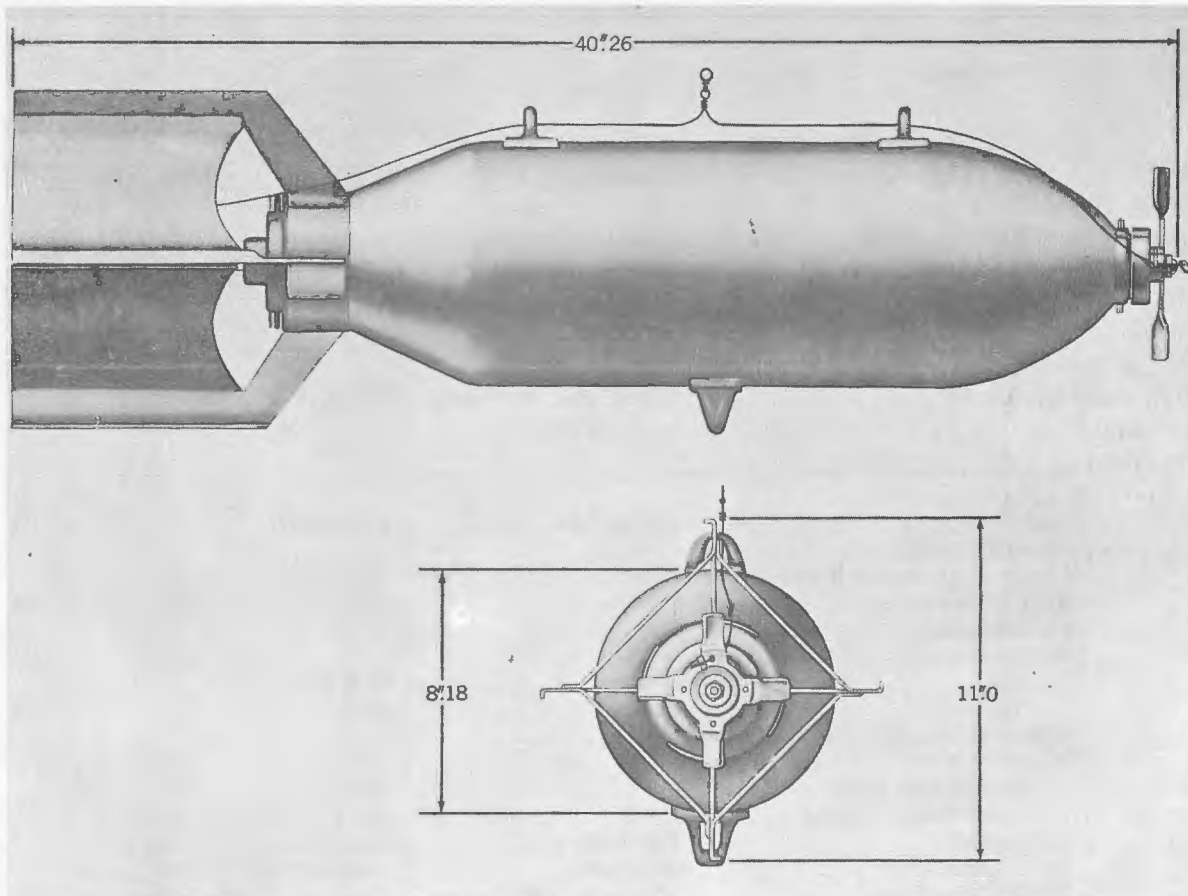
100-lb GP Bomb AN-M30A1 with Fin Assembly AN-M103A1, Exterior View.
